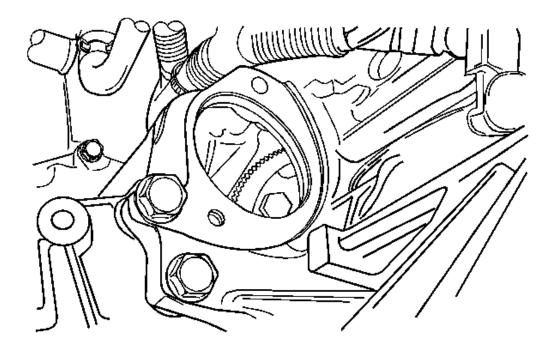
Inspecting Case Courtesy of GENERAL MOTORS CORP.
